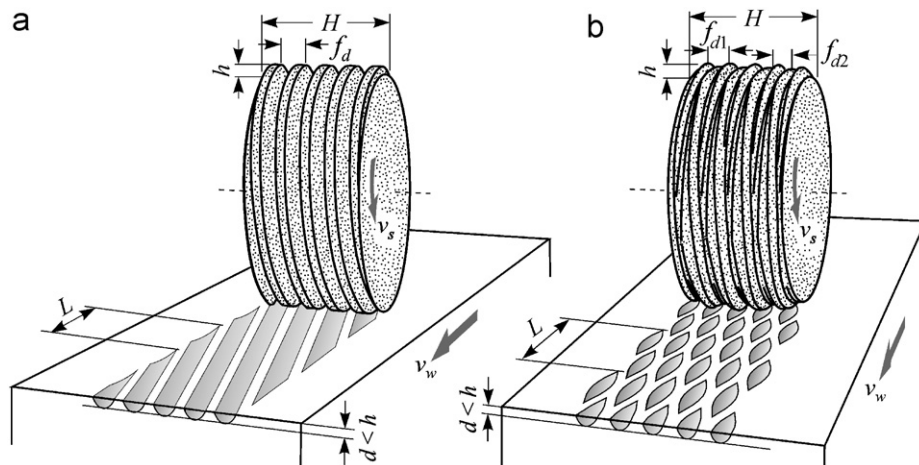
Schematic views of a grinding with the wheel having single (a) and double (b) helical grooves for shaping regular patterns on a flat surface [17, 24].
